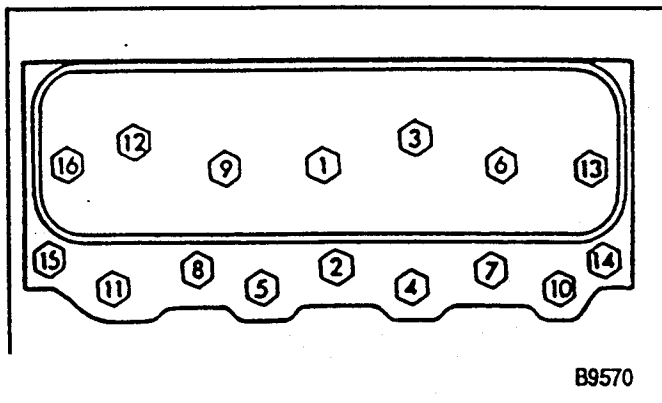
Cylinder Head Bolt Tightening Sequence (7.4L Engines)
